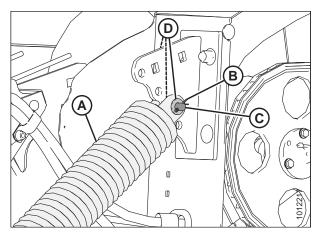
Left Side Spring Float Assembly Shown – Right Side Opposite
